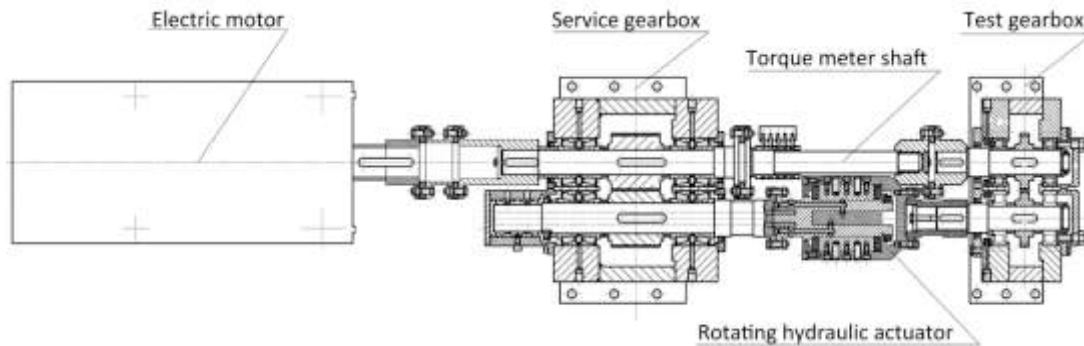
Mechanical recirculating power test rig for tests on gears.
